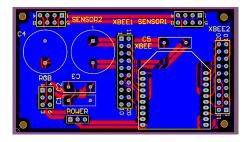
Bottom Layer of Sensor Circuit PCB
